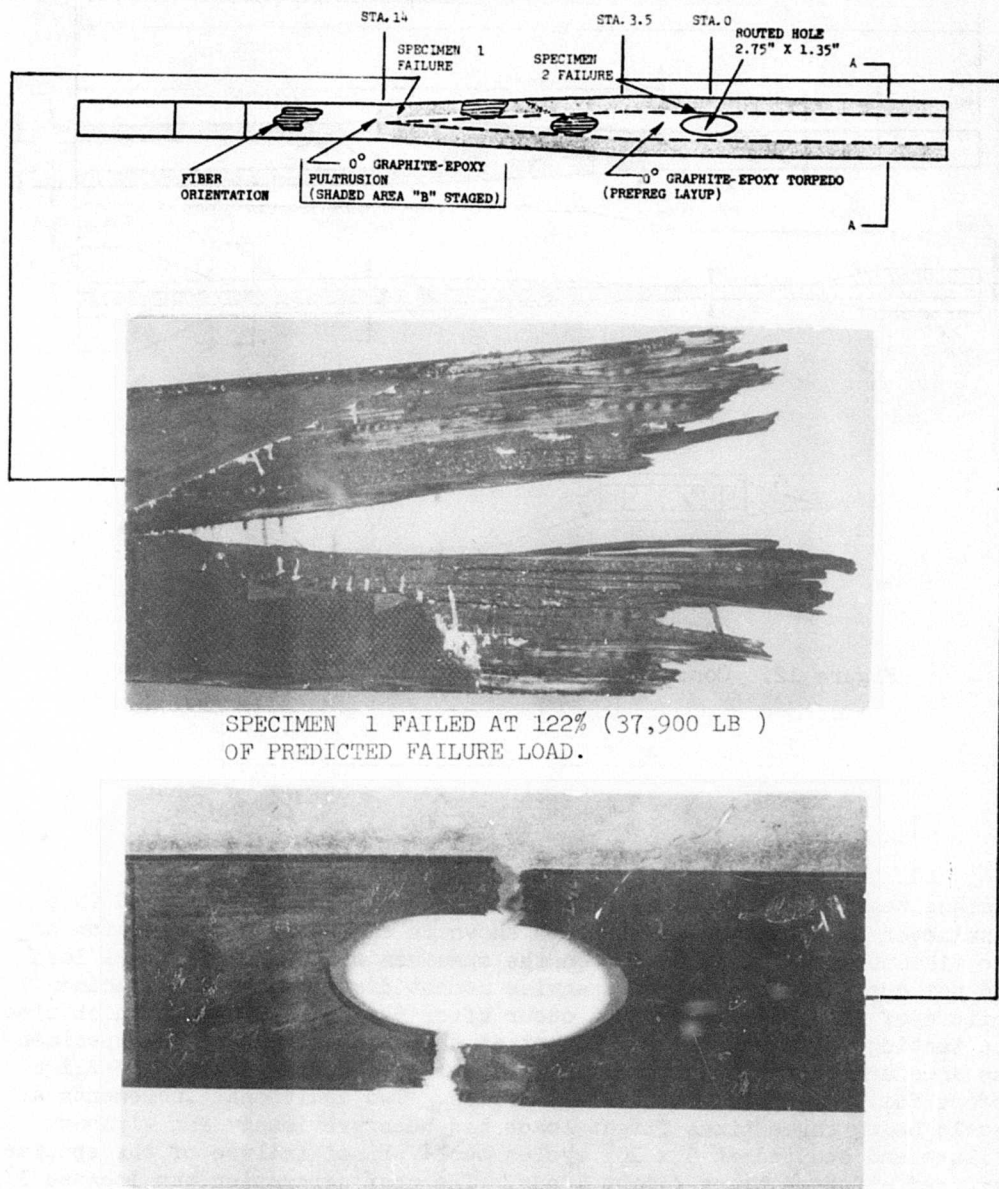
Concept II - Subscale Static Specimen Detail Failures.
